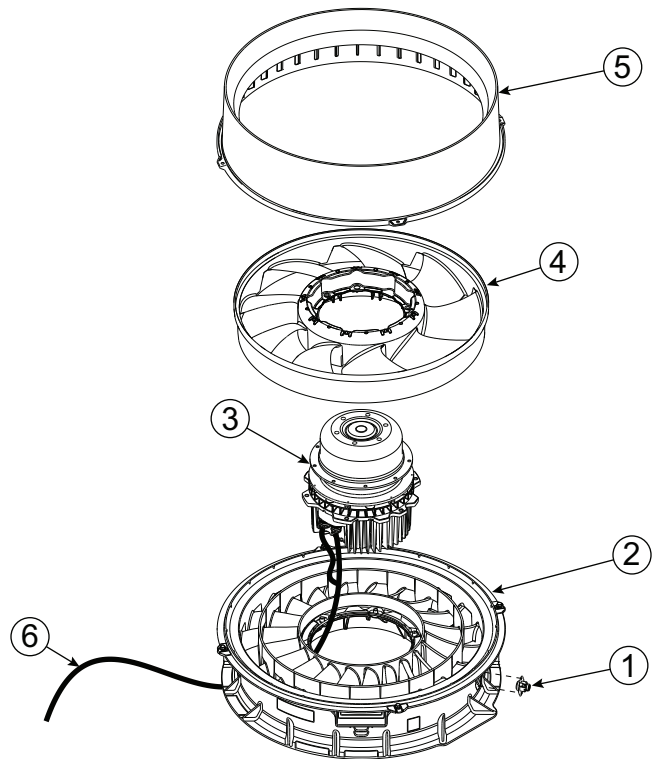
Standard/Medium Fan System Re-Assembly
